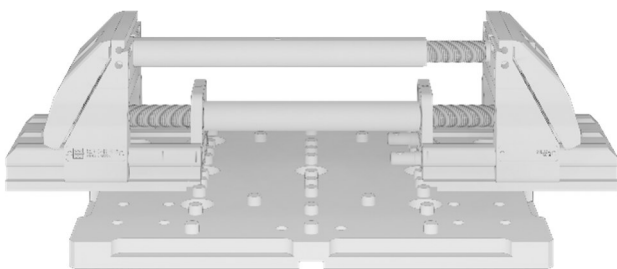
Clamping system with clamping range extension on 400x400 mm adapter plate
